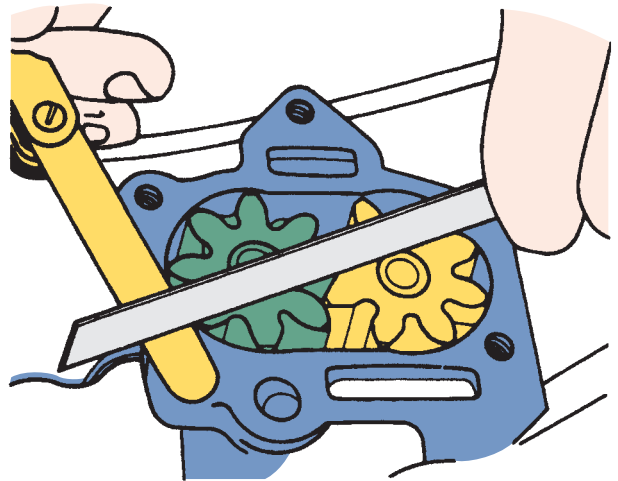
Use a straightedge and feeler gauge to check the flatness of the pump's sealing surface.
